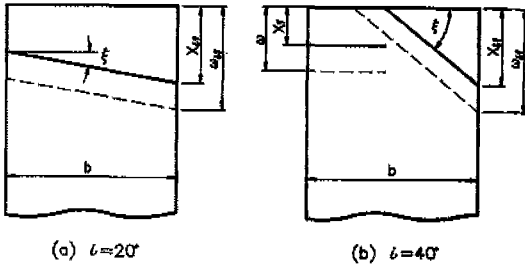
Configuration of Fracture Surface in Oblique Cutting
